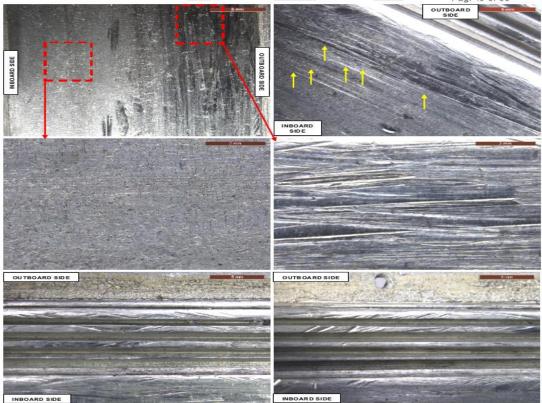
Details of the support bearing sleeve assembly inner surface. The threads and the duplex bearing seat completely lost the yellowish color of the chromate conversion treatment required by the drawing. The inboard bearing seat shows no significant damages, while the outboard bearing seat is characterized by a multitude of circumferential marks (yellow arrows) and deep inclined nicks. The nicks are also visible on the thread.
